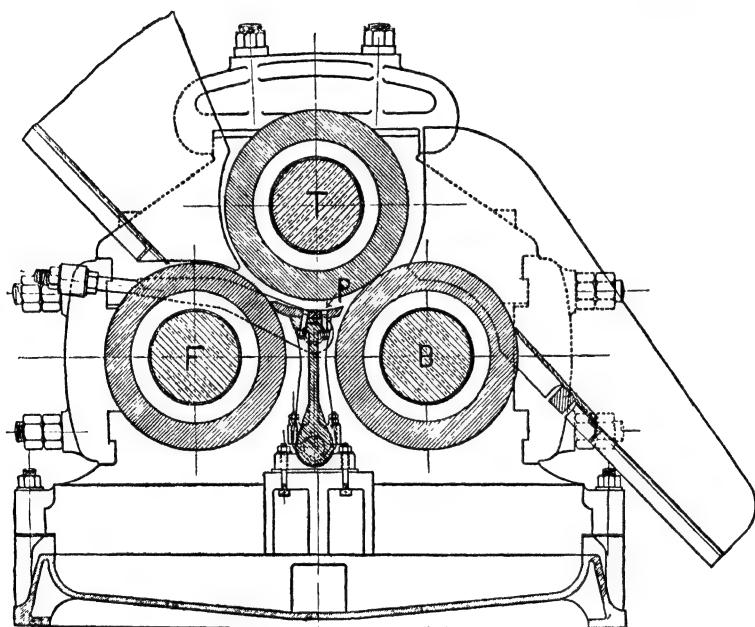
VERTICAL SECTION OF THREE-ROLLER MILL.
